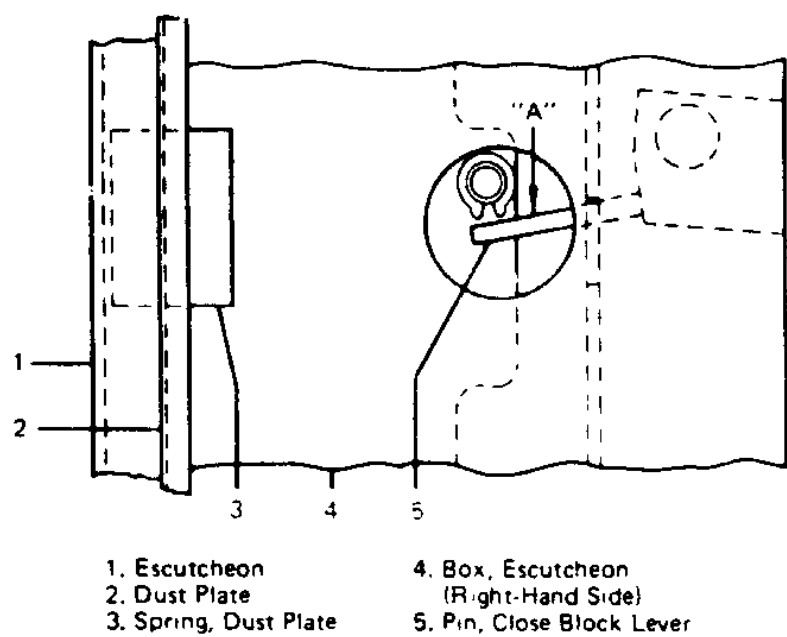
Partial View of Escutcheon Assembly (Right-Hand Side) Showing Slow Close Lever for Electrically Operated Circuit Breakers
